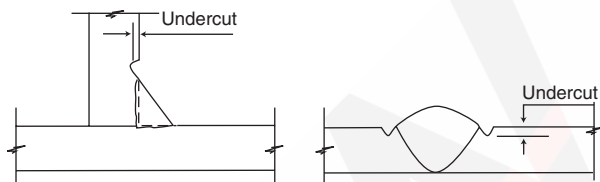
Undercut in Butt and Fillet welds
